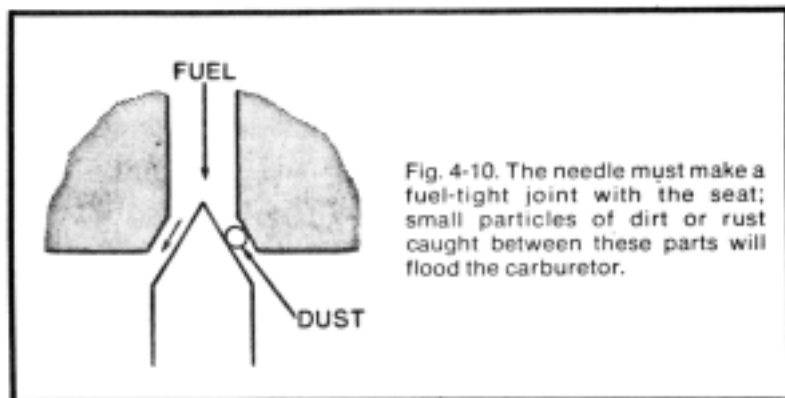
The needle must make a fuel-tight joint with the seat; small particles of dirt or rust caught between these parts will flood the carburetor.
